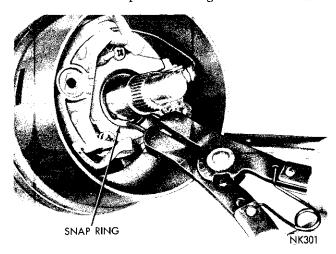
Removing or Installing Steering Shaft Snap Ring
